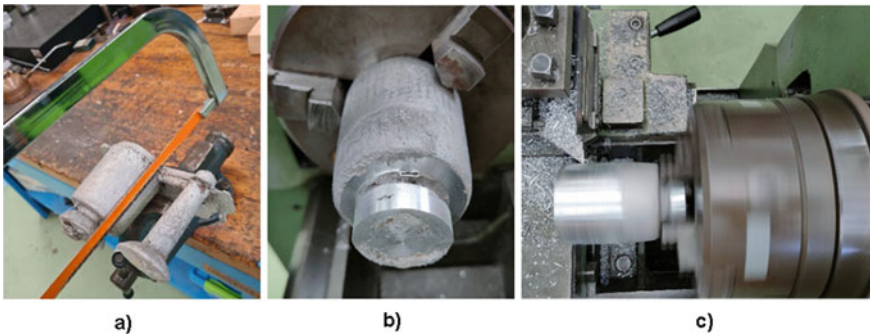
Manual machining processes a sawing the feeder system b turning riser c rough turning piston
